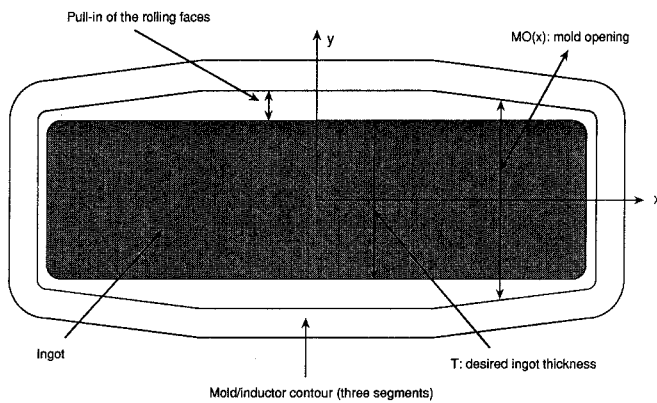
Schematic top view of the mold/inductor shape required to produce flat rolling sheet ingots.
